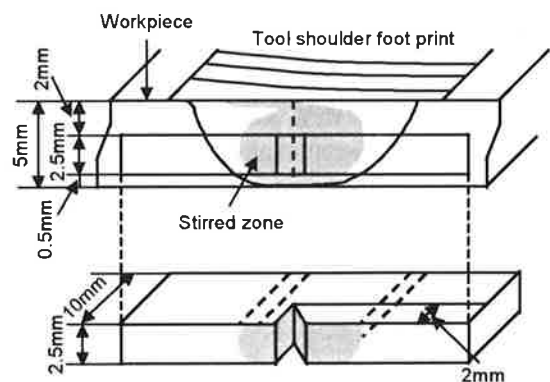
Schematic drawings of Charpy impact test specimen, (a) location at a workpiece and (b) geometry (2mm V-notch).
